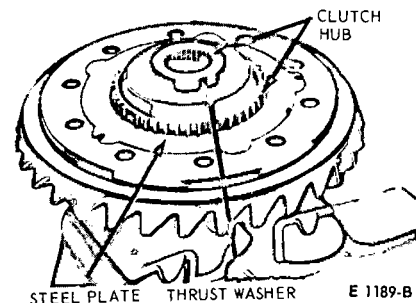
Installing Steel Clutch Plates and Friction Plates
